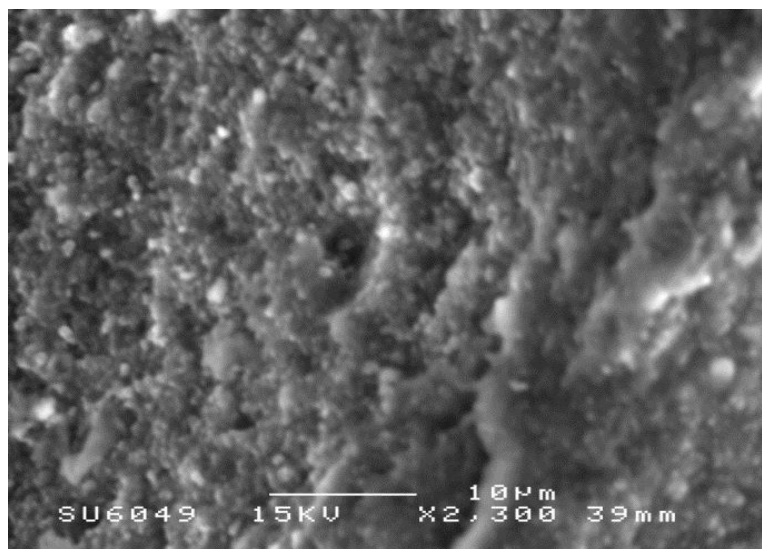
Mirror, mist and hackle morphology of the fractured surface of O-ring tested under 90% CO<sub>2</sub> in methane, the crack direction is indicated by the arrows.
